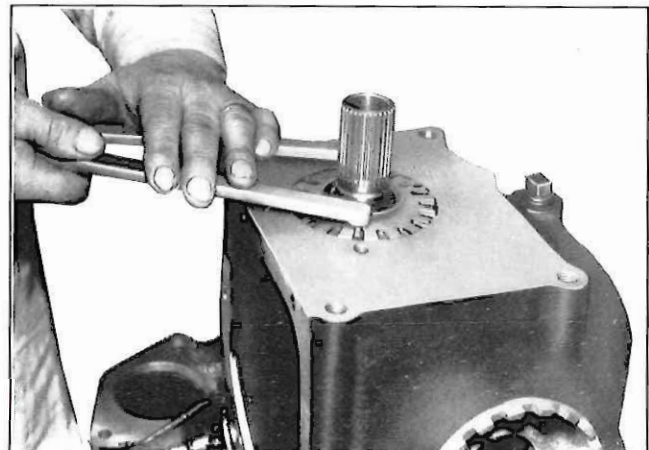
Tightening Pinion Bearing Adjusting Sleeve with J-972
